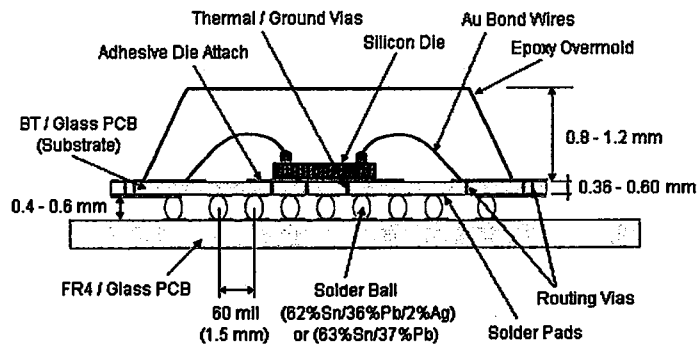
Cross Sectional View of a Typical PBGA (Mahajan, 2001)
